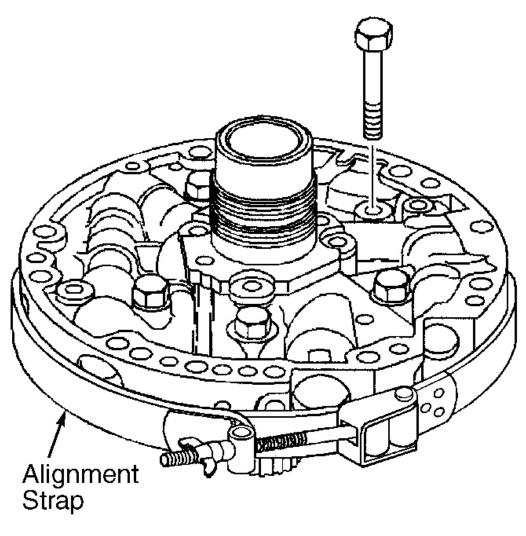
Assembling Oil Pump Internal Components Courtesy of GENERAL MOTORS CORP.
